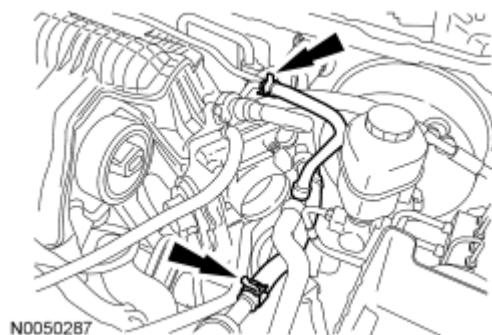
Heater Hose & Positive Crankcase Ventilation (PCV) Coolant Hose
